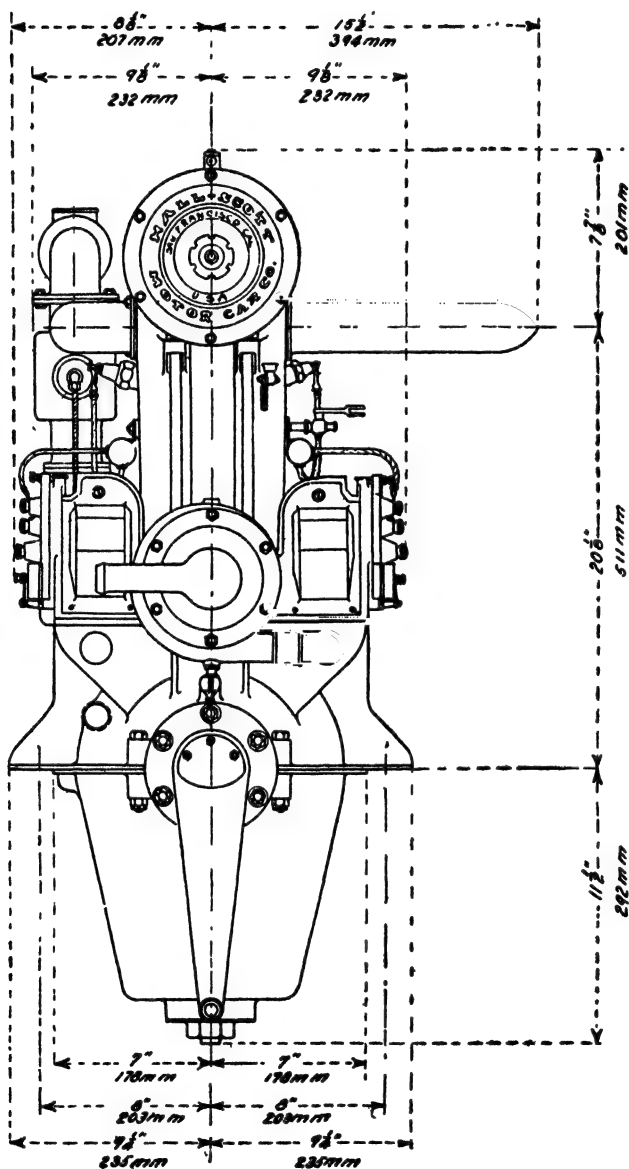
End Elevation of Hall-Scott A7 Four-Cylinder Motor Giving Principal Installation Dimensions.
